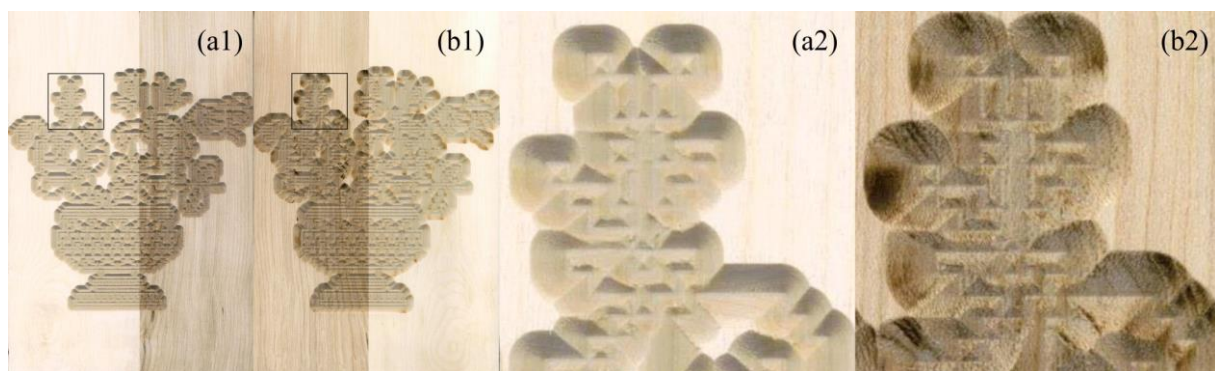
Router milling of Model 1: (a1) – Engrave 90° ; (a2) – Detail for Engrave 90° ; (b1) – Engrave 120° ; (b2) – Detail for Engrave 120° .
